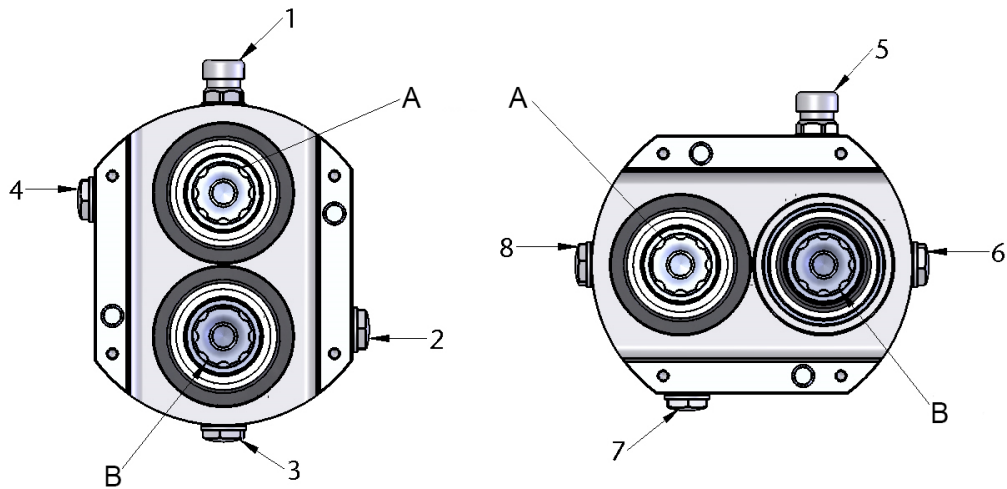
Possible positions of oil sight glass, locking screws and bleed valve
